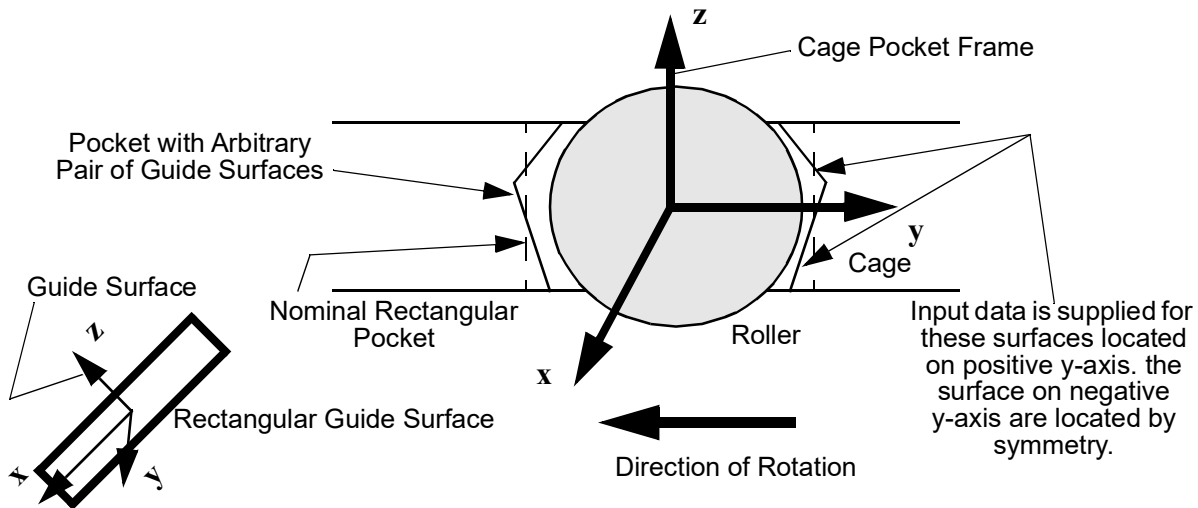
Definition of cage pocket guide surfaces for roller bearings.
